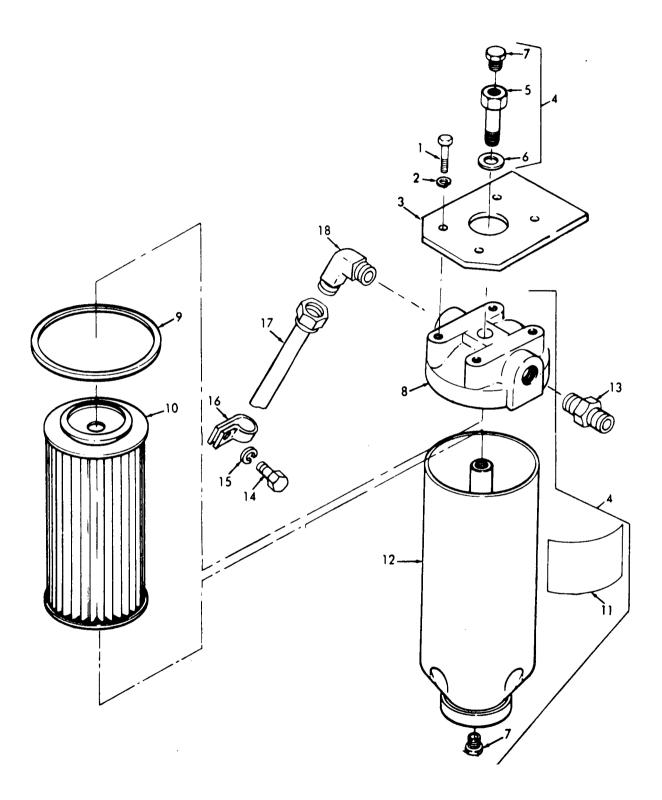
Secondary Fuel Filter, Removal and Installation.
